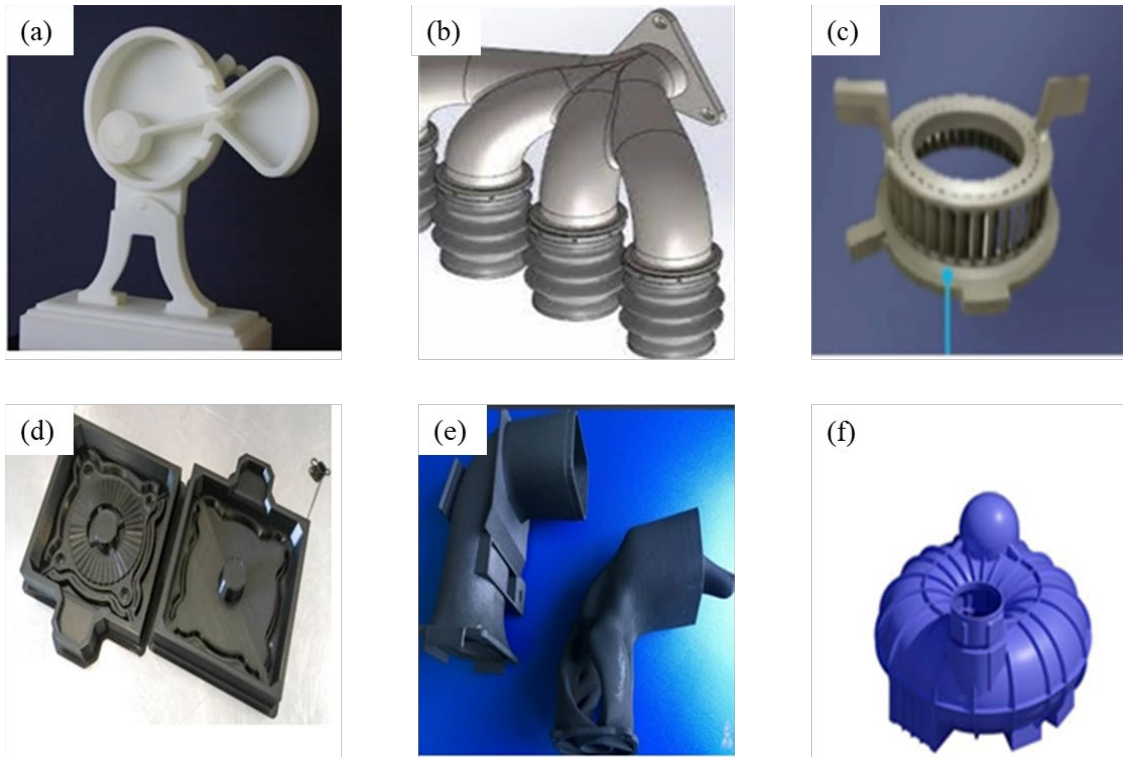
(a) Prototyping of double-chamber leaf pump; (b) Four port to one port duct assembly; (c) 3D printed combustion chamber; (d) 3D FFF printed gear mold; (e) 3D FFF printed flow optimizer; (f) 3D printed tank [71], [72].
